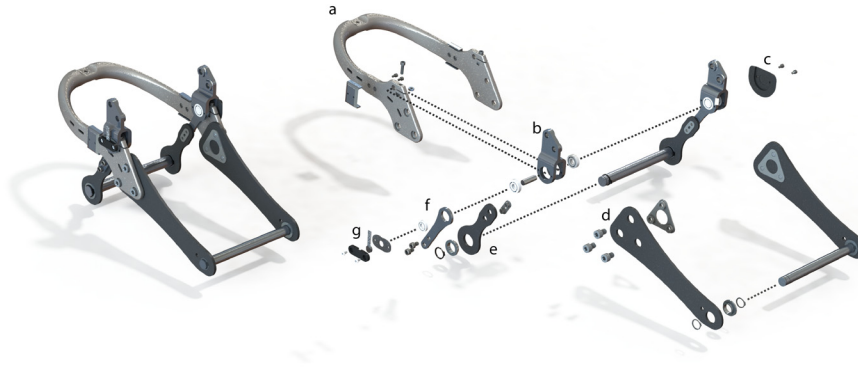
Foot segment of the exoskeleton. Assembled (left) and exploded (right) views of the right foot segment of the exoskeleton. (a) Titanium heel spur. (b) Ankle joint assembly. (c) SLS nylon joint cover. (d) Toe strut assembly. (e) Heel strut assembly. (f) Heel strut bearing mount. (g) Encoder assembly.
